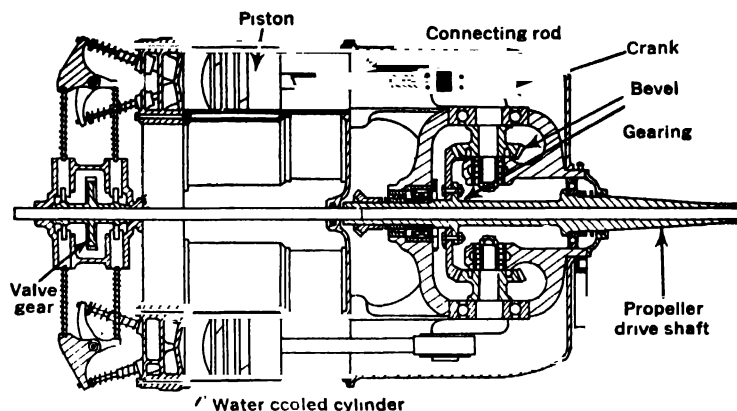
The Cleveland Aviation Engine Was an Unusual Barrel Type that Used Short Cranks and Bevel Gearing Instead of a "Wobble" Plate.
